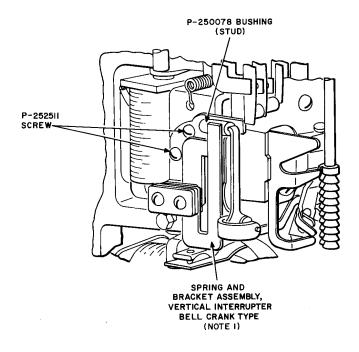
Bell Crank Vertical Interrupter Spring and Bracket Assembly and Associated Parts
